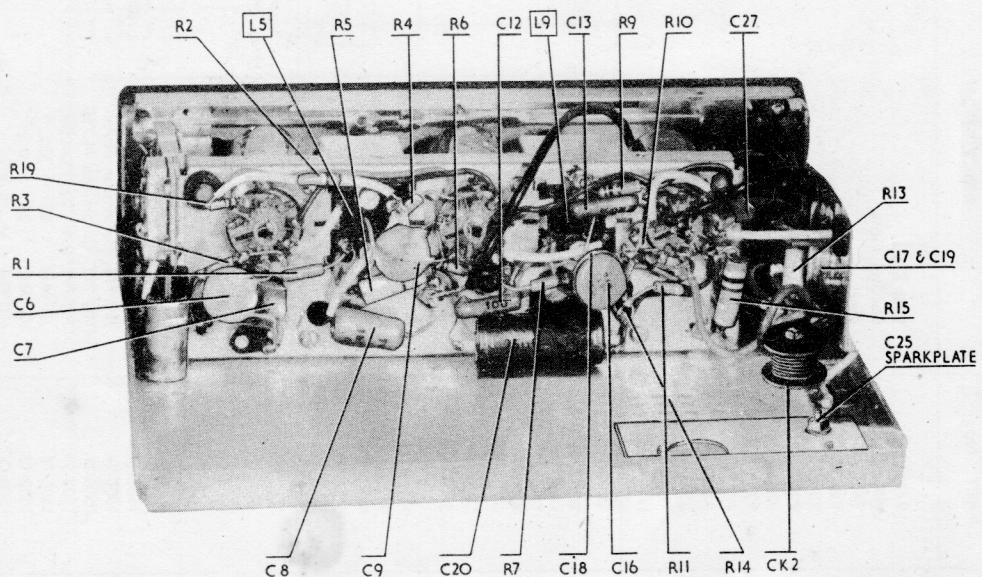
UNDERSIDE VIEW OF VALVE CHASSIS
